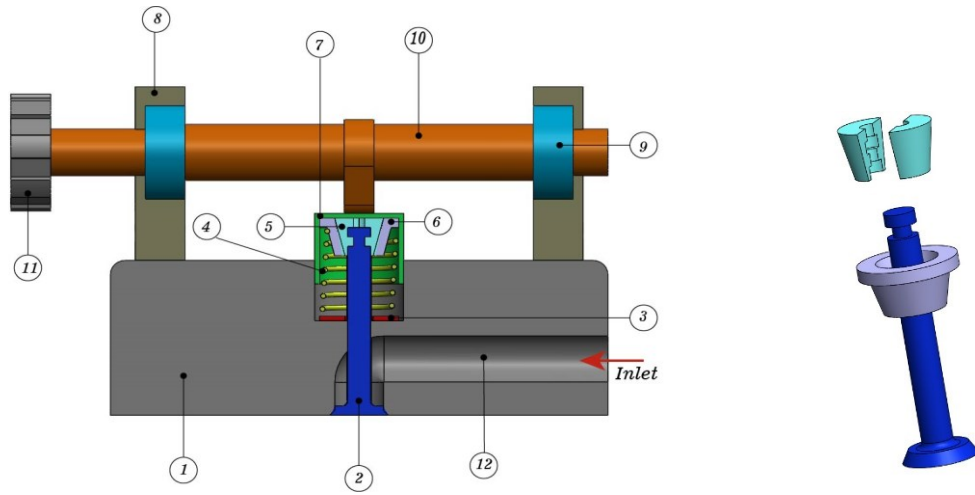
Poppet valve on a single cylinder engine (left) and layout of the valve components (right)
